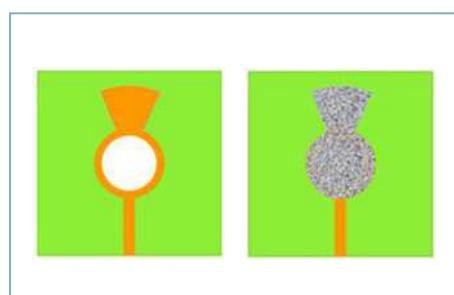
Layout area for additional solder paste volume: layout and after printing
